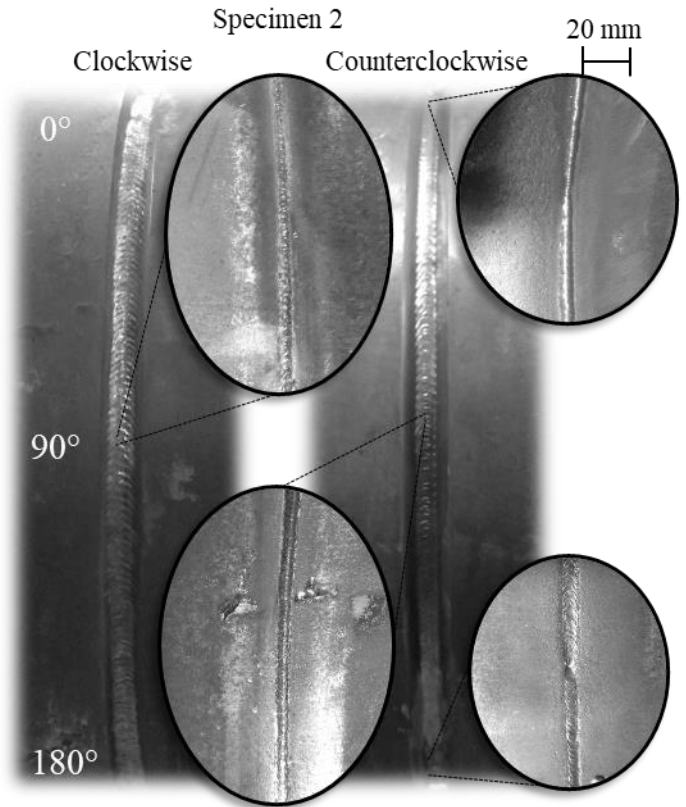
RESULTS OBTAINED FOR SAMPLE 2 USING THE AI ADAPTIVE ORBITAL WELDING ALGORITHM (WHEN PRESENT, TRANSVERSAL MARKS ASIDE THE ROOT (BOTTOM) VIEW WELDS ARE NOT A WELD DEFECT, HOWEVER MARKS OF THE C ASSEMBLY FIXING ACCESSORY).
